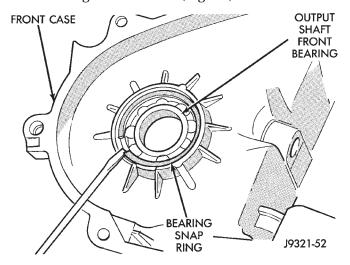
Output Shaft Front Bearing Snap-Ring Removal
